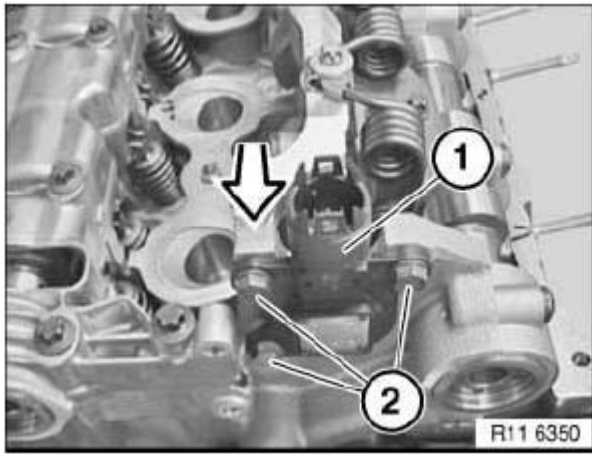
Identifying Cylinder Head Bolts And Eccentric Shaft Sensor
